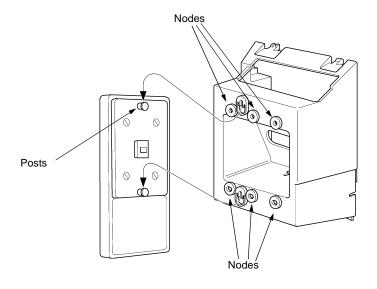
Attaching the Wall Mount Unit to the Wall
